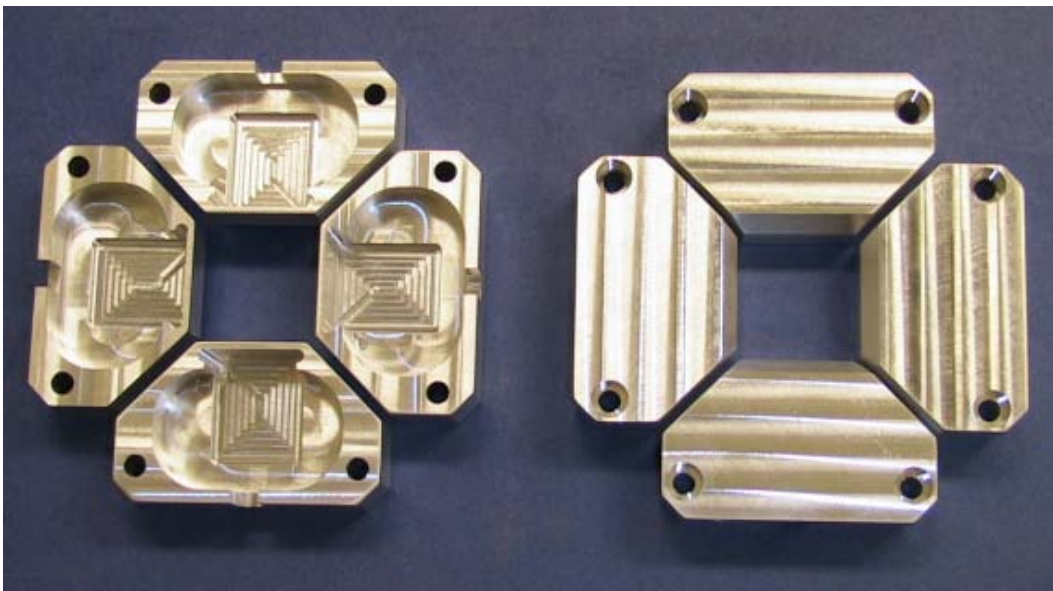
Fabricated ASFM actuator housings prior to core and coil installation.
